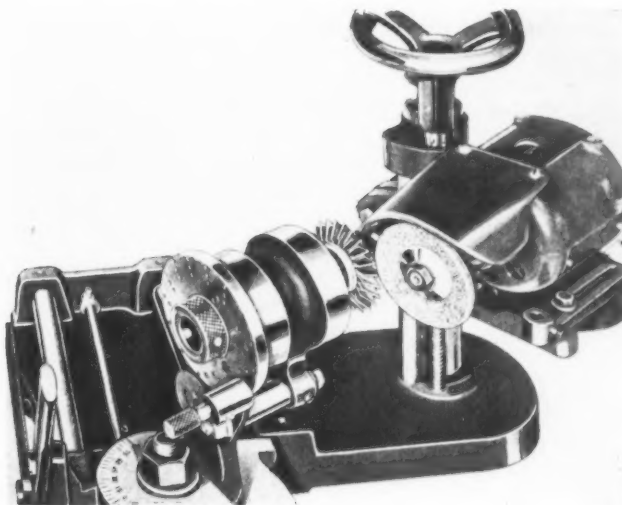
Cutter Grinder with Index Dividing Head, Set up for Sharpening Double Angular Cutter
